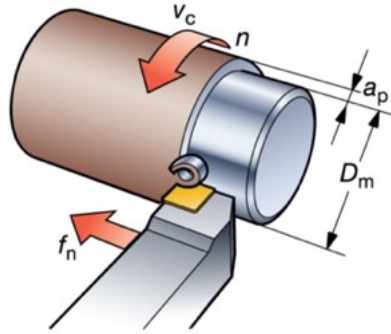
Schematic drawing of longitudinal turning operation showing the general set-up for cutting a cylindrical workpiece material and some important features and parameters. (Courtesy of Sandvik Coromant.)
